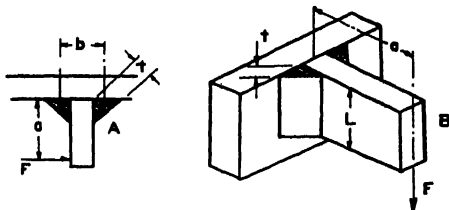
Transverse Fillet Welded Joints Subjected to Flexure.
